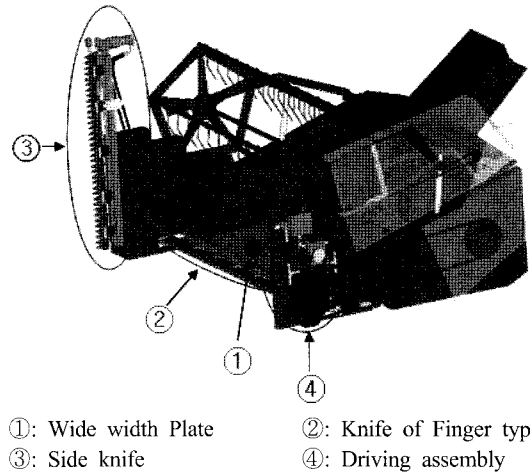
Prototype rapeseed reaping equipment attachable to conventional combine.
